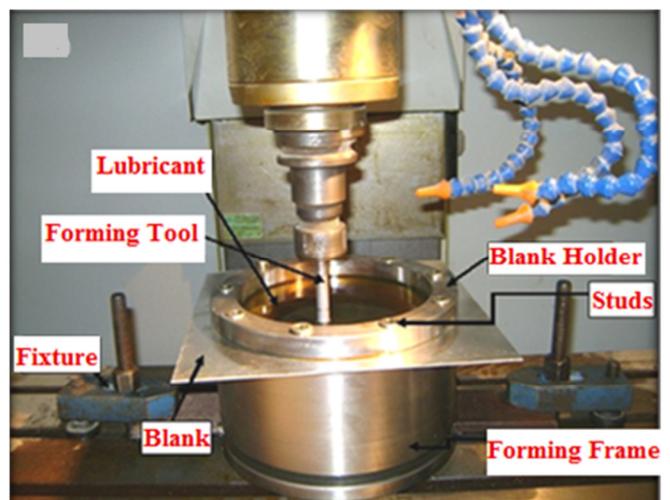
Conventional CNC milling machine c-tek technology corporation (KM-80 D) experimental setup (die and blank holder).
